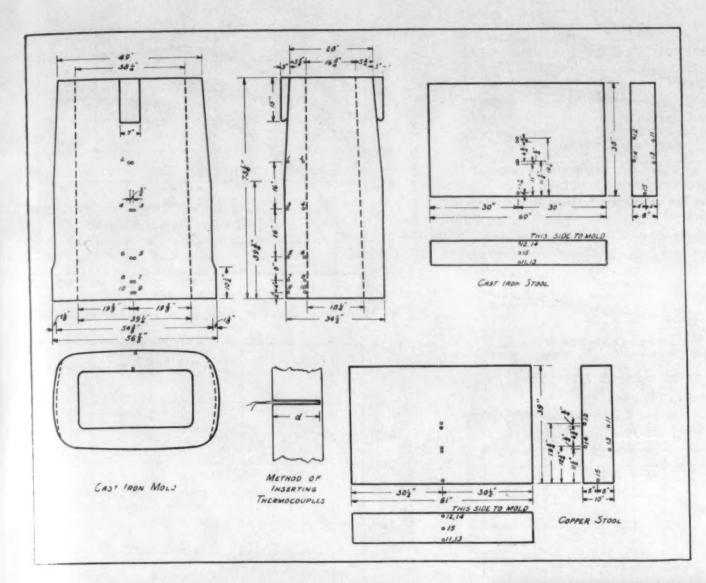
Approximate Mold and Stool Dimensions and Locations of Thermocouples in the Mold and Stools.
